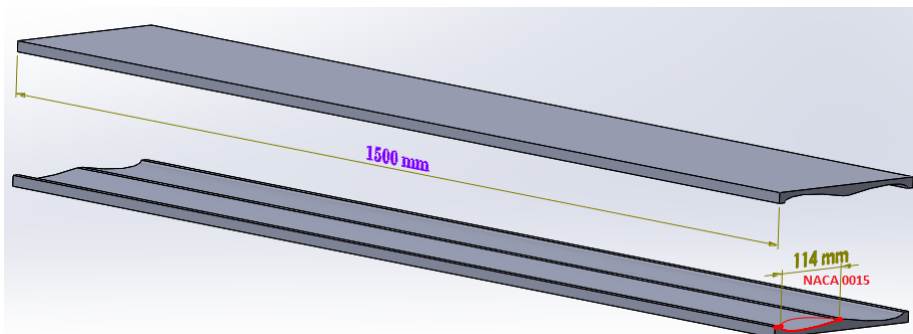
Molds used to manufacture the hydrofoils.
